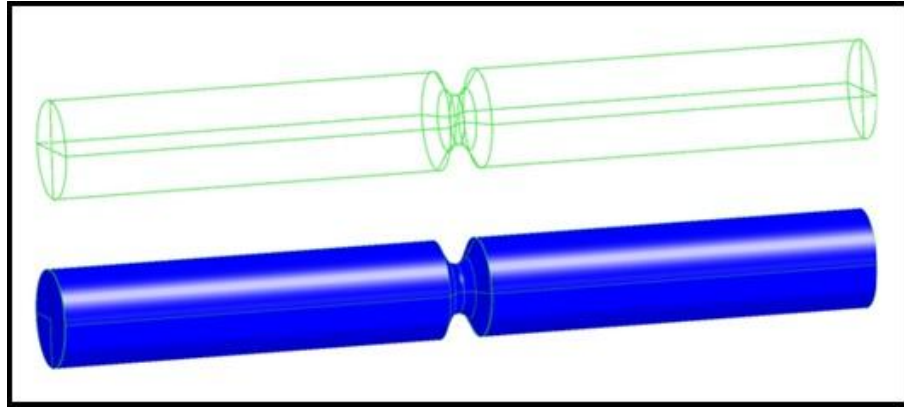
The steps to defining the boundary surfaces of a V-notched cylinder ($r=1.588$).
